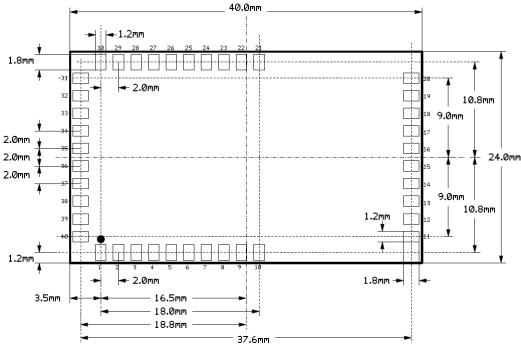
Pad dimensions of swarm bee LE V2 module
